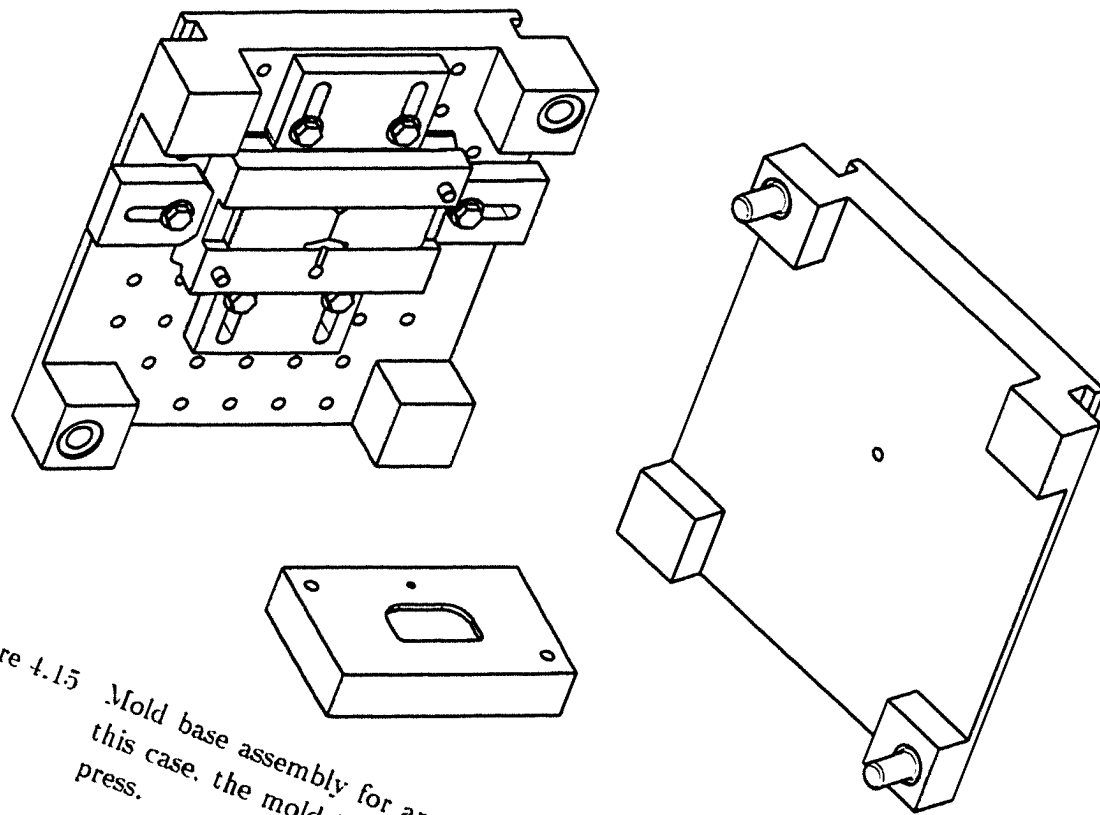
Mold base assembly for an alternative manual operation. In this case, the mold is assembled and opened on the molding press.
